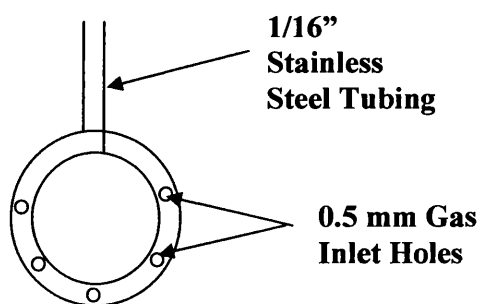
New secondary gas inlet design to improve gas mixing (scale = 1:3)
